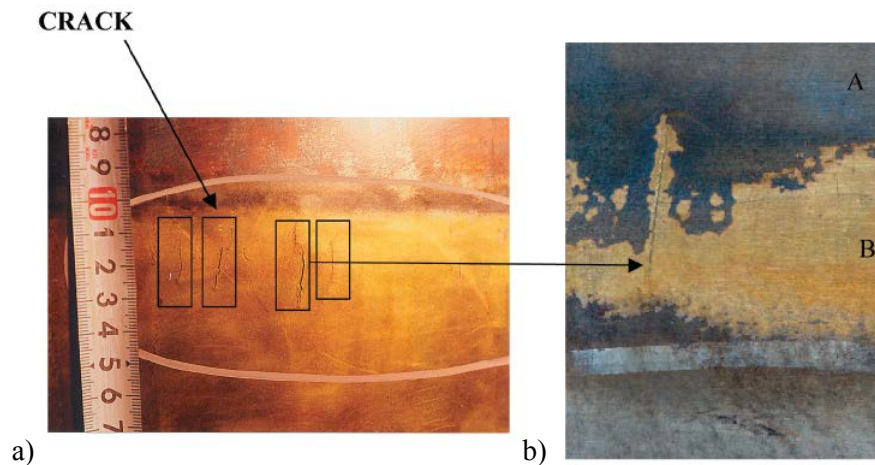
a) Photograph of mould cracks and b) magnified view [Park, 2002b]
